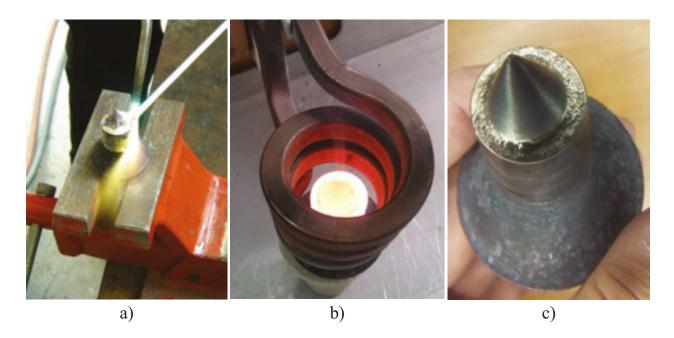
Procedures for brazing dissimilar joints between steel and tungsten carbide: (a) oxy-flame brazing; (b) induction brazing; (c) brazed assembly [7].
